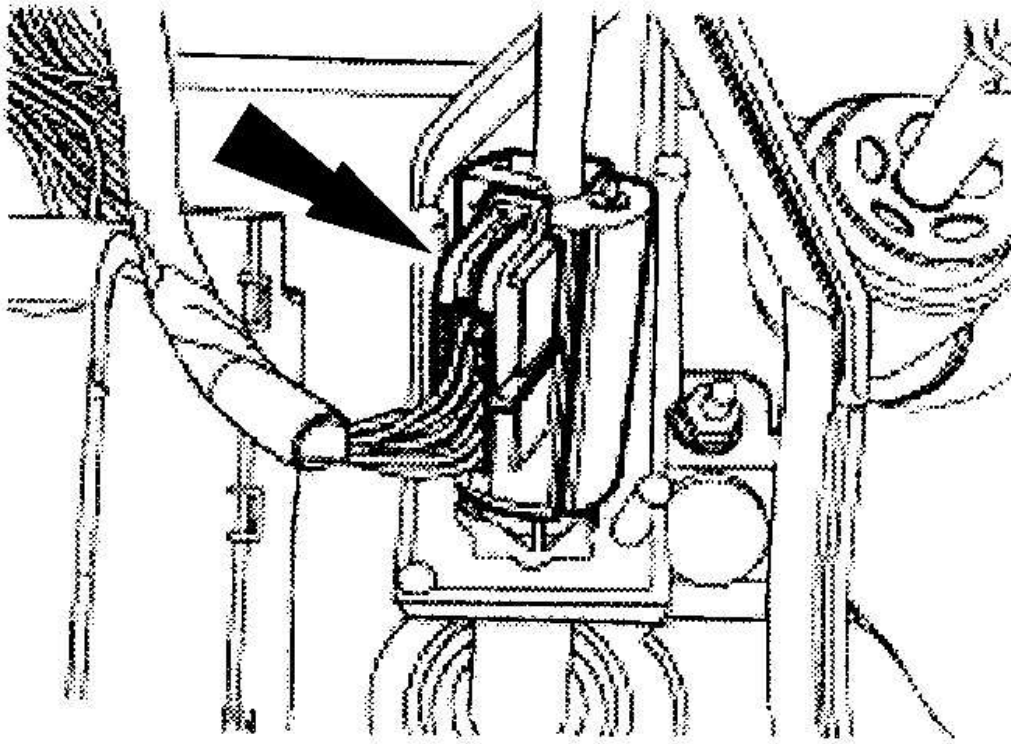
Removing & Installing Lower Steering Column Finish Panel
